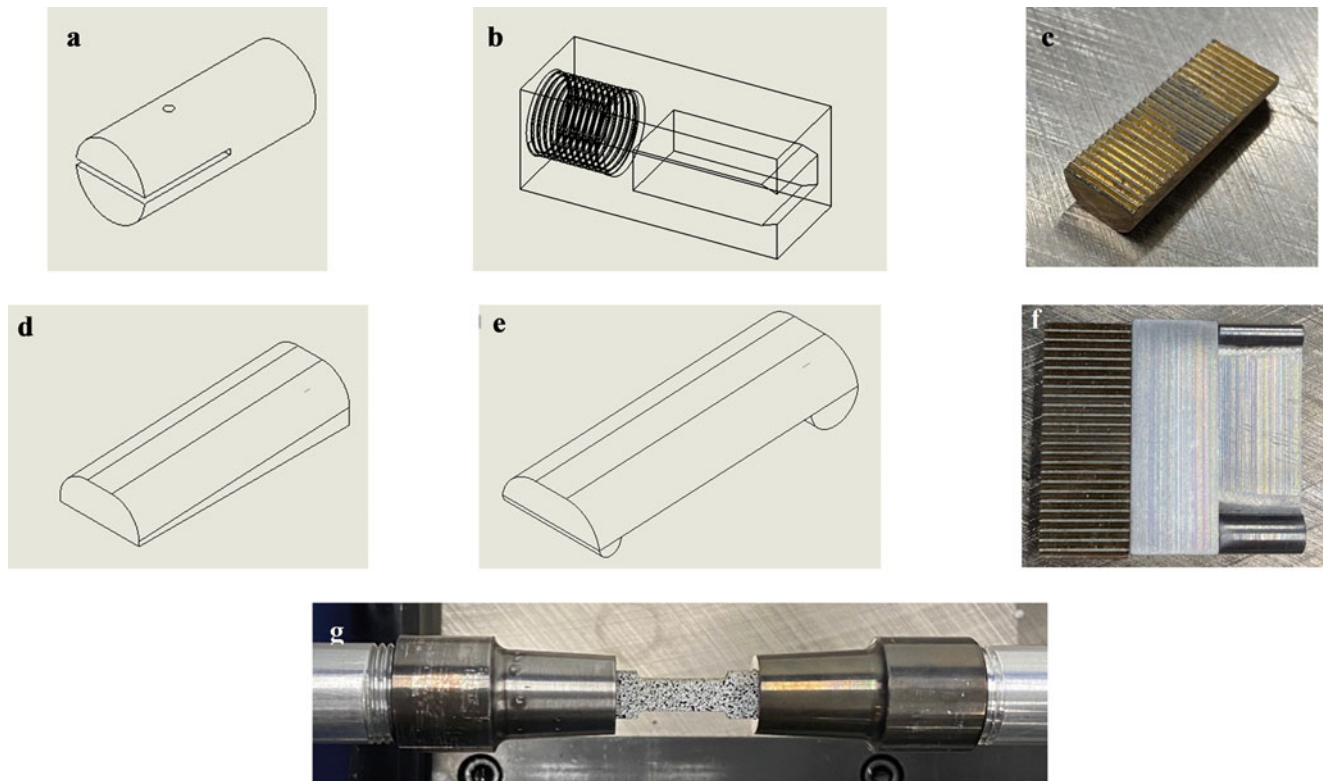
Five gripping methods were evaluated: (a) clevis grip, (b) shoulder grip, (c) toothed wedge, (d) flat wedge, and (e) line-type. (f) All wedges were scaled to the same dimensions. (g) The wedge grips (c)–(e) were press fitted in a collet
